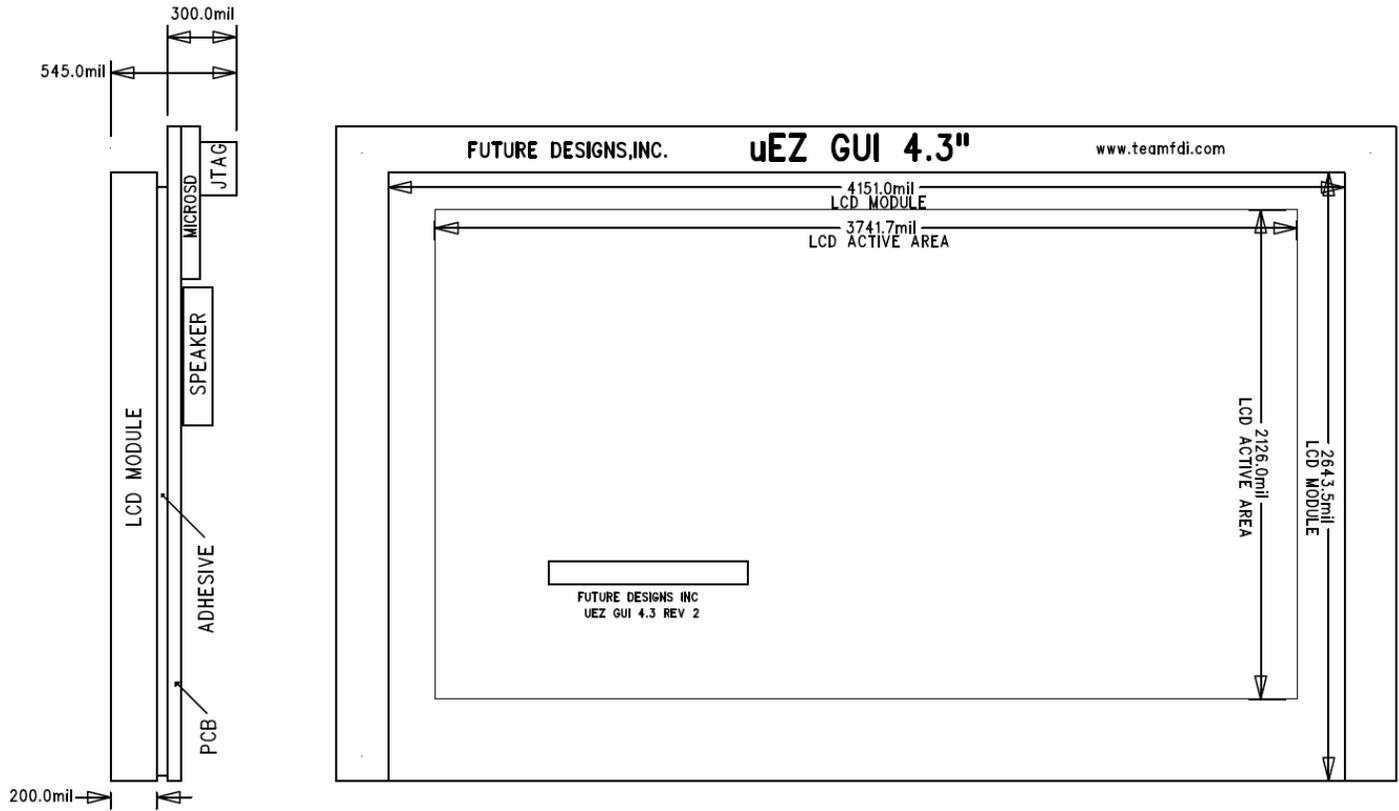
Mechanical Dimensions (LCD Module View and Side View)
